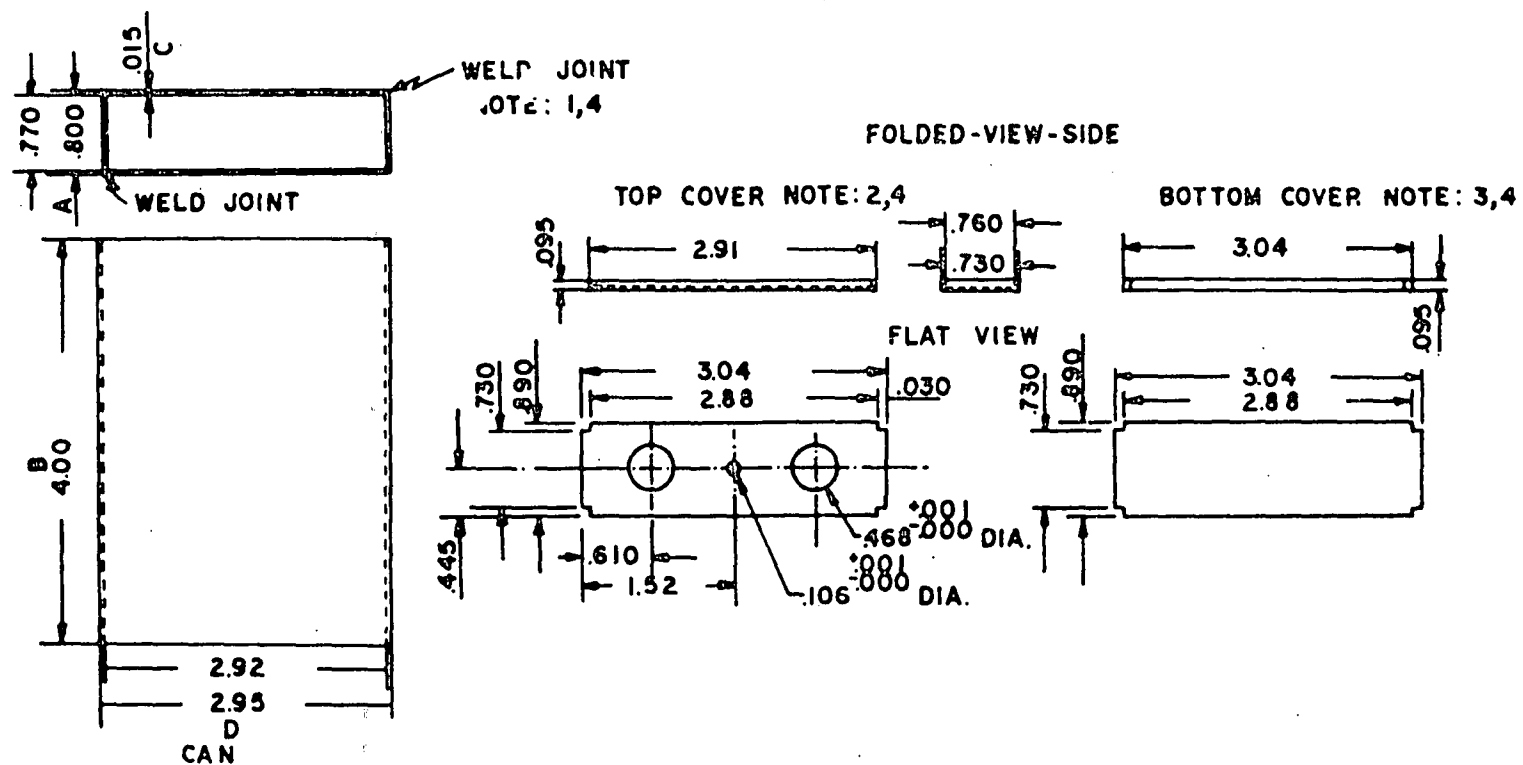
Can assembly material 304L SS, Part No. T-12100
